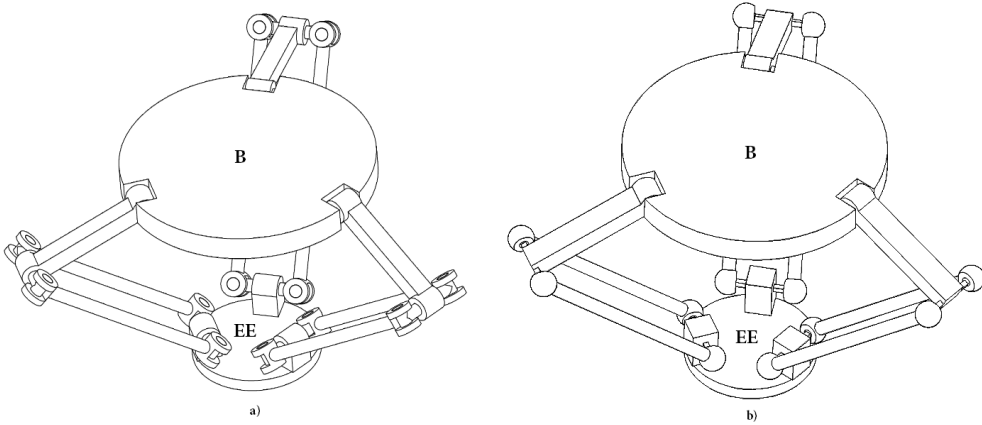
3 DOF Delta mechanisms with a) revolute joints and b) spherical joints
